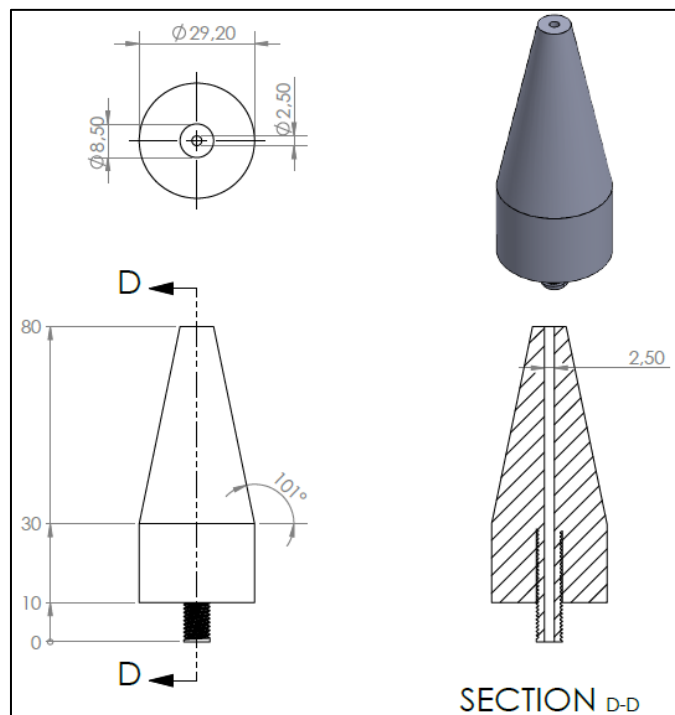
Extruder Die Mandrel Design (Scale 1:1)
